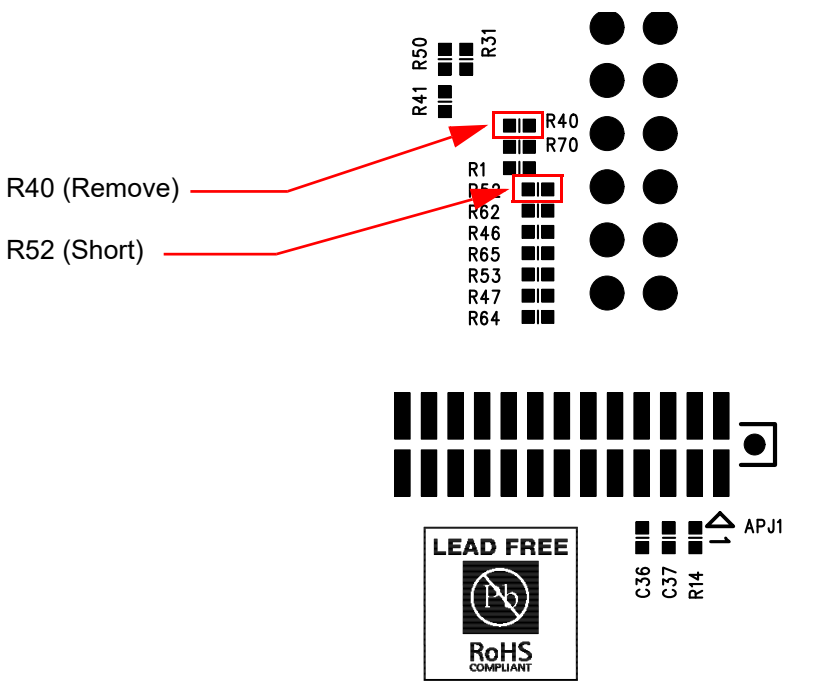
Location – R40, R52 (bottom side of the PCB)
